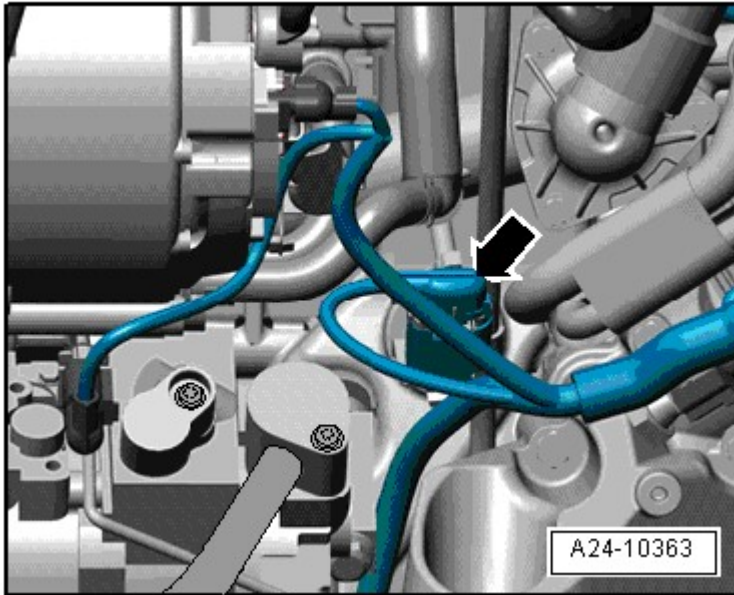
Locating Engine Speed (RPM) Sensor -G28- Electrical Connector
